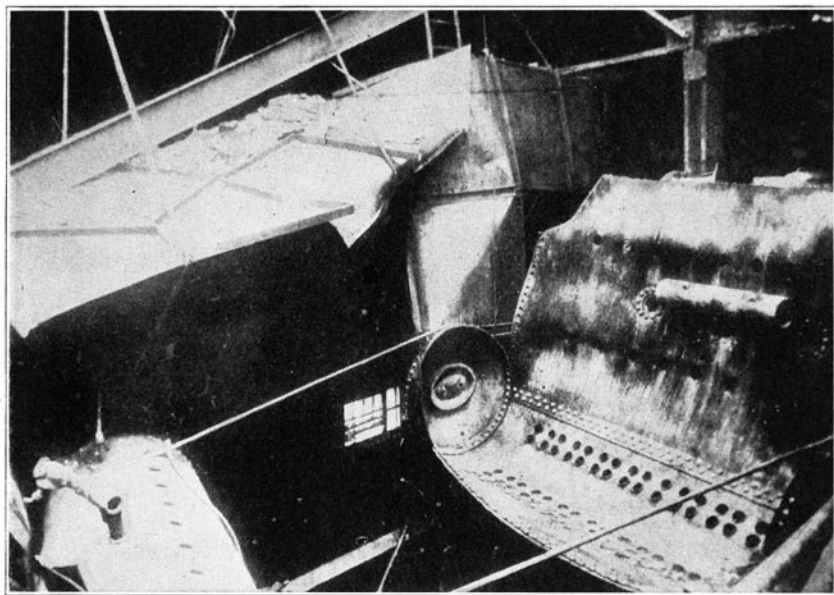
BOILER EXPLODED AT BLOOMINGTON, ILLINOIS
